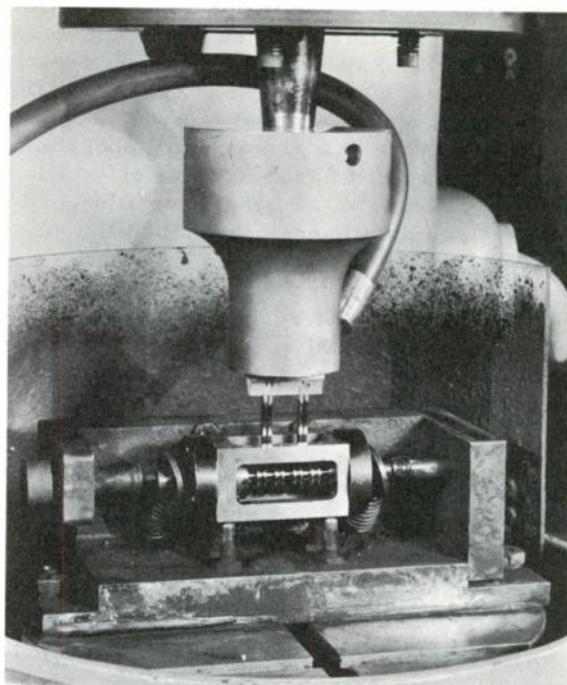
Hydraulic servo valve machining setup. Valve body in supporting fixture is located in chuck of machine. Ultrasonic toolholder and cutting tools are shown in cutting position for one pair of parts. Hose shown behind tool ready to flood work area with abrasive slurry during machining operation.
